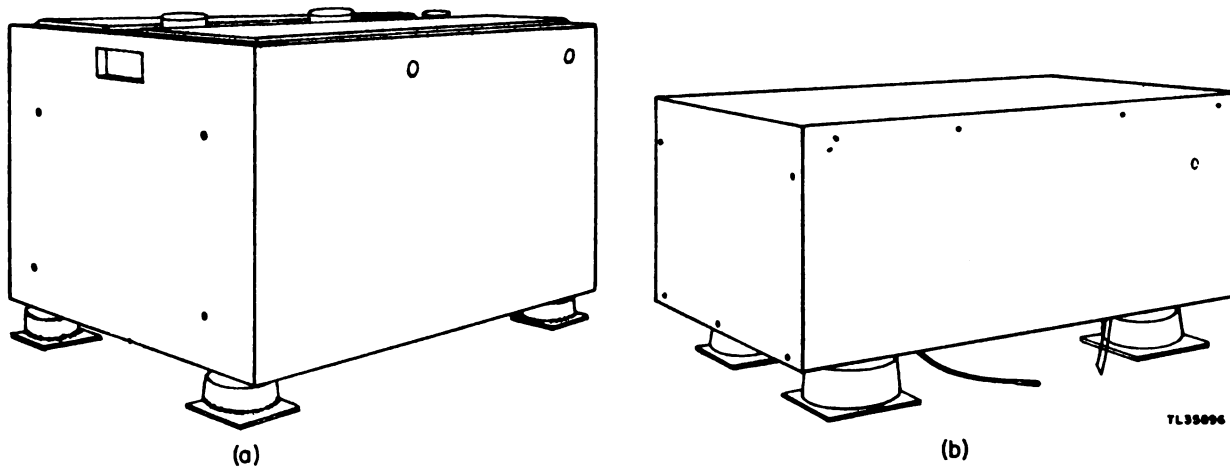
Transmitter-Receiver Assembly and Dynamotor Unit PE-94-A or PE-98-A.
